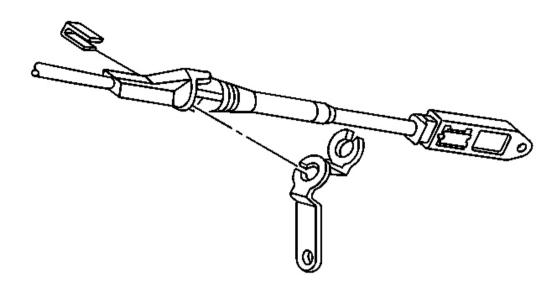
Shift Control Cable Bracket & Shift Control Cable Courtesy of GENERAL MOTORS CORP.
